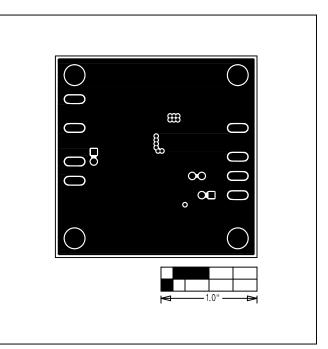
MAX17504 3.3V Output EV Kit PCB Layout—Inner Layer 2
